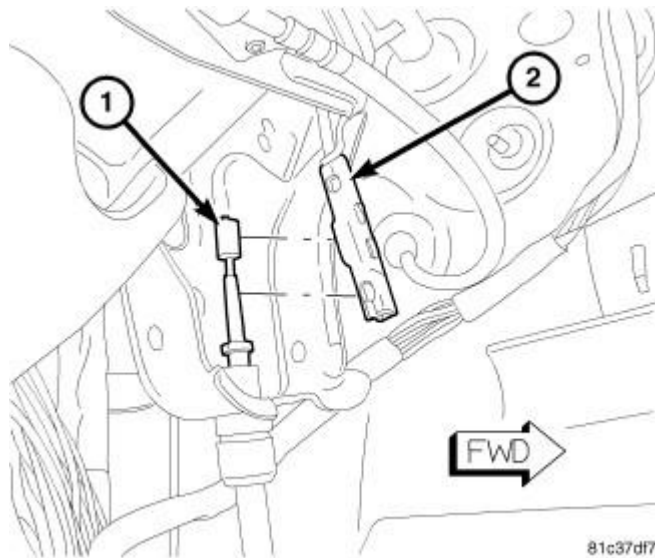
FRONT CABLE AT LEVER CONNECTOR
